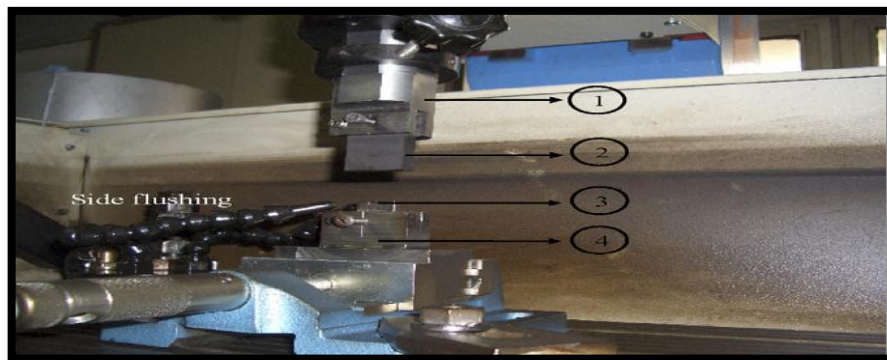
Sample of EDM figure. (1) tool holder, (2) electrode, (3) workpiece, (4) workpiece holder
